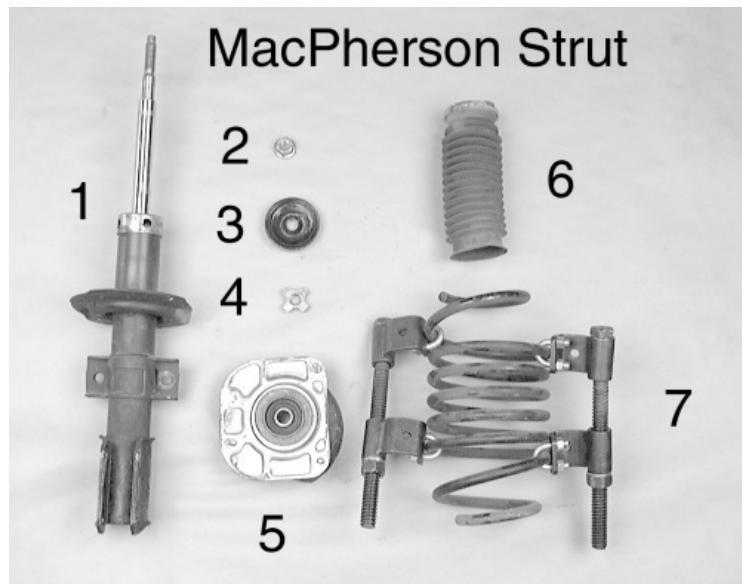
Disassembled strut components include a strut tube (1), retaining nut (2), bearing dust cap (3) and locknut (4), bearing and upper spring seat (5), boot (6) and compressed spring (7)
